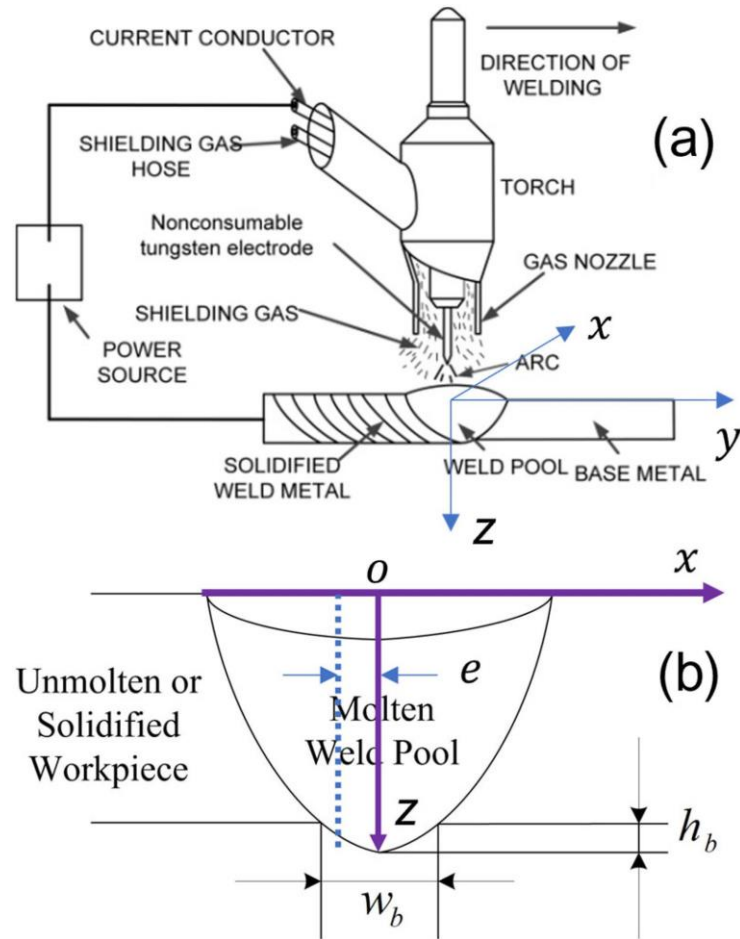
GTAW and complete weld penetration. (a) Illustration of GTAW process; (b) Cross section of the workpiece and weld. Axis z is that of the tungsten electrode and the weld is in general symmetrical about it. The dot-line in (b) is the interface of the two metals being joined and e is the seam tracking error
